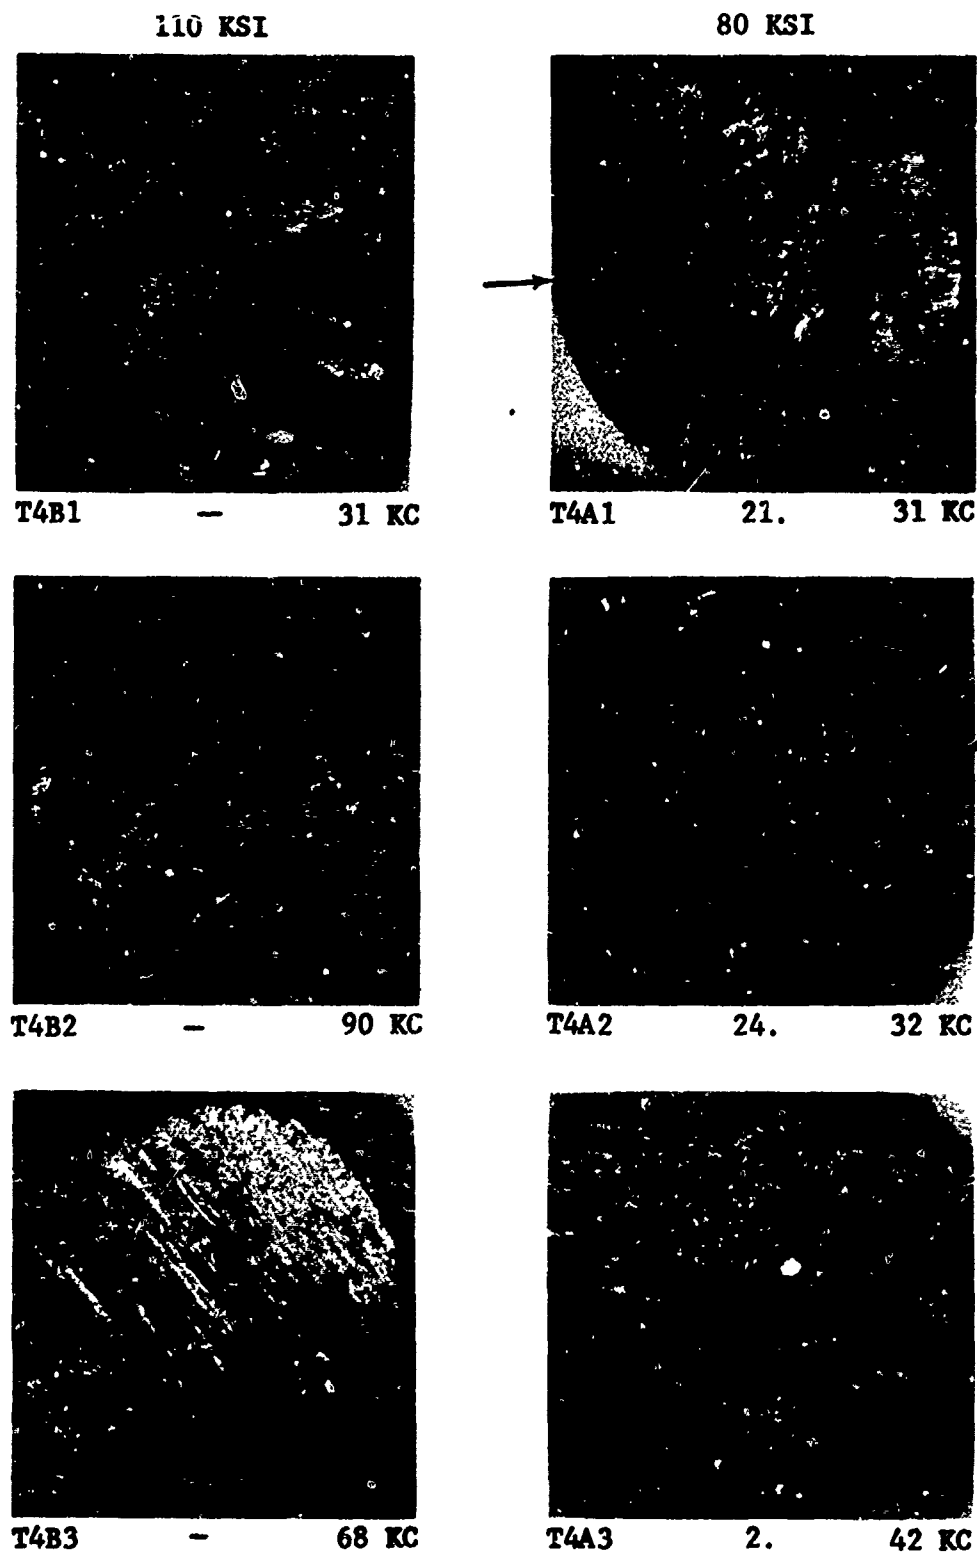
Fracture Surfaces of Failed Fatigue Specimens Series R4-
